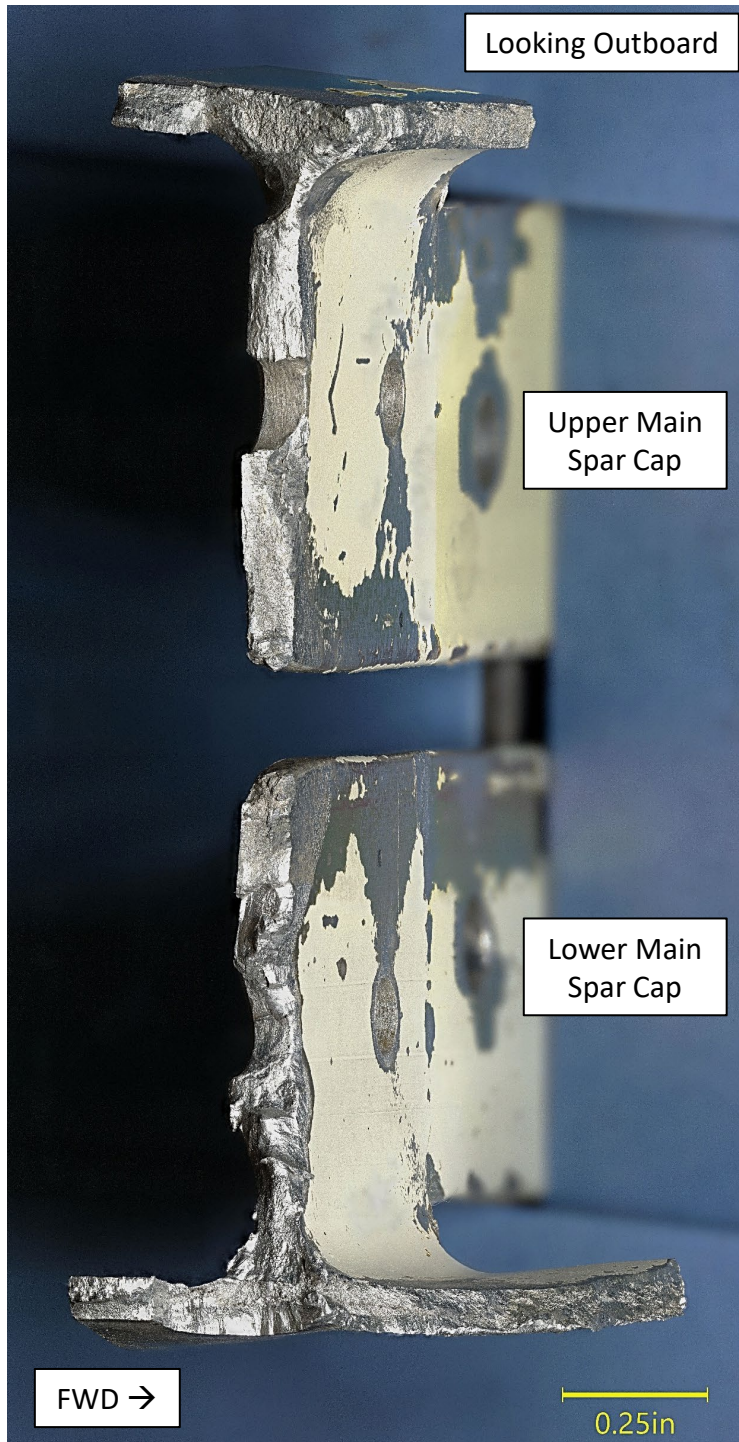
Digital microscope image of the upper and lower main spar cap fracture surfaces (outboard fracture location) viewed tilted slightly aft.
